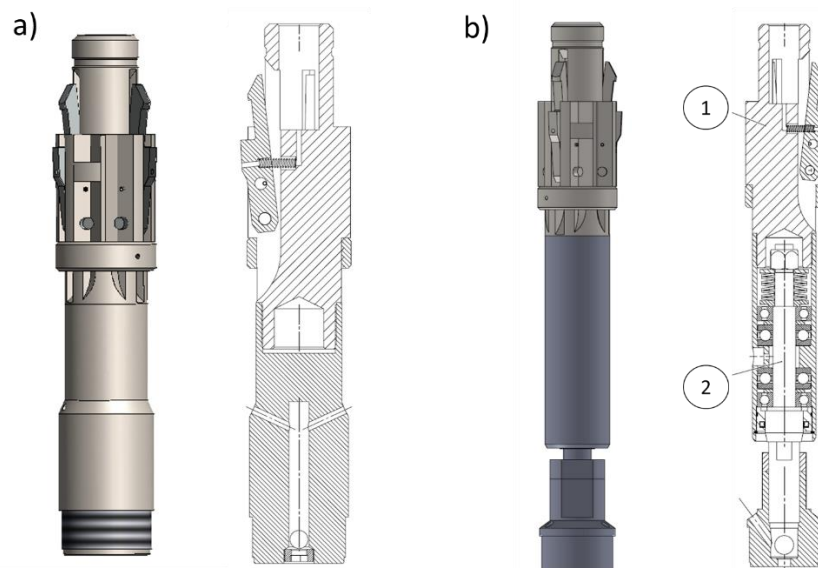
View of CAD reconstructed fixed (a) idler (b) devices.
